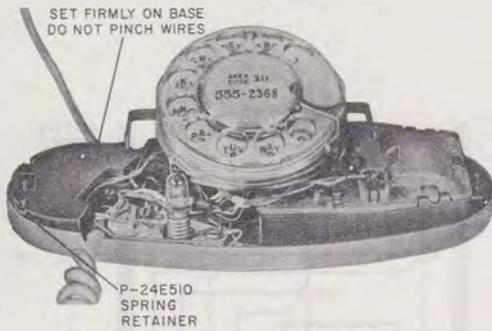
Location of P-24E50 Spring Retainer and P-15E719 Weight
